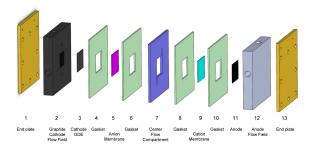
Formic acid cell exploded isometric assembly drawing [11]
